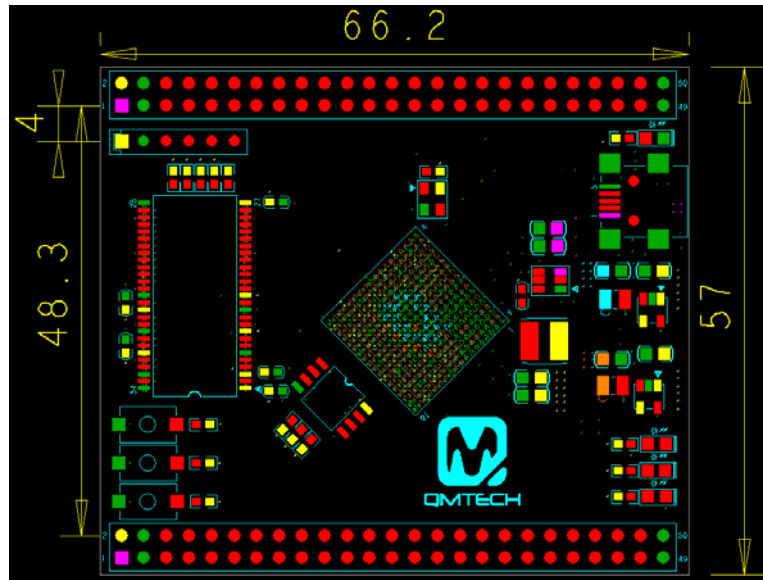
QMTECH XC7A15T Core Board Dimension
